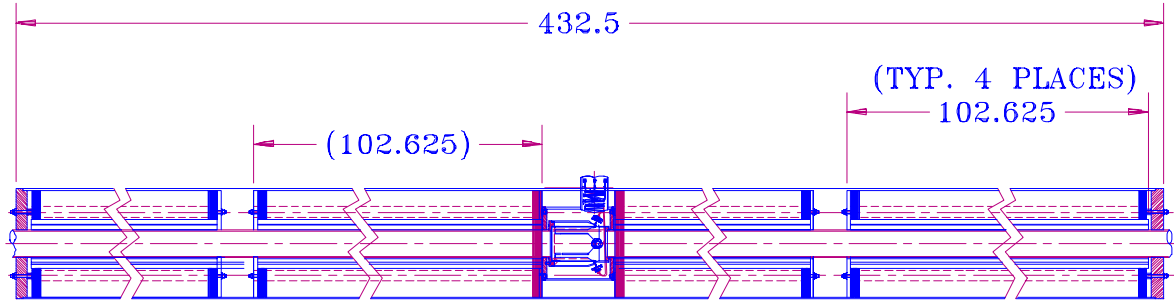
A Snake or Rotator cold mass consists of four individual helical cold masses, or “storage units,” assembled into an integrated assembly as shown. Dimensions are shown in inches.
